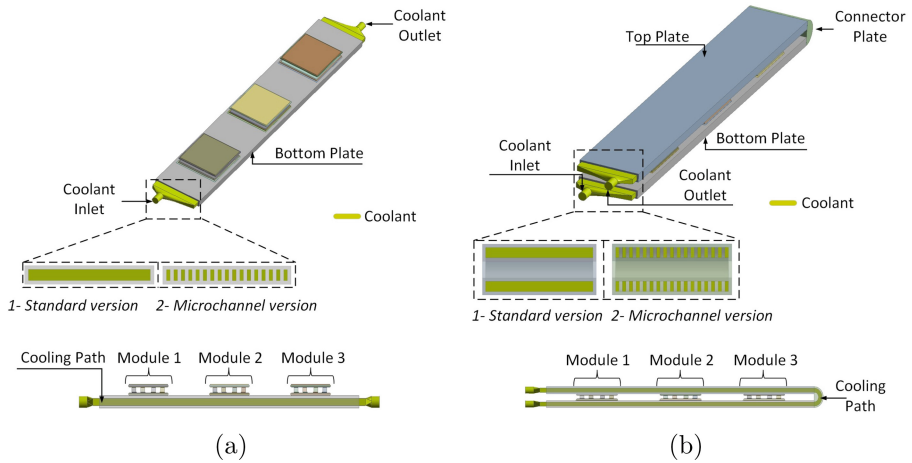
Cold plate designs: (a) single-sided, (b) double-sided.
